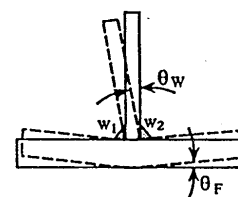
Schematic showing of angular distortion in T-type fillet welds
